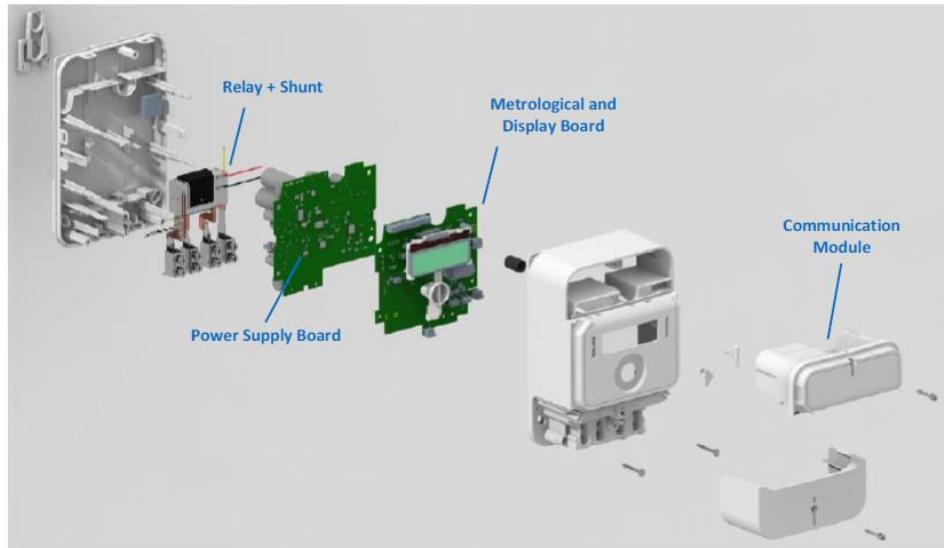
GLOBYMGNG3 Basel Version exploited view
